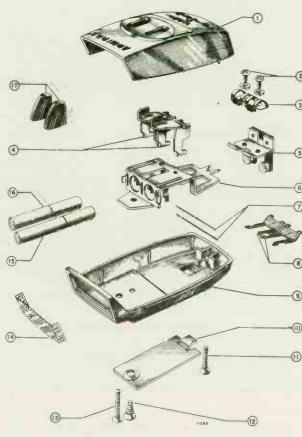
Exploded View of Son-r Tuner S21A. See Parts List for part numbers and descriptions.
